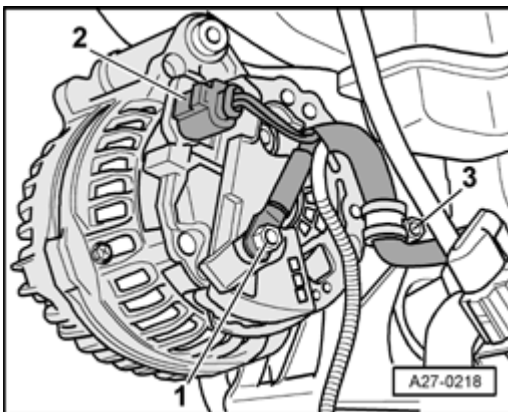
Identifying Connector, Electrical Wire And Wiring Clamp On Generator
